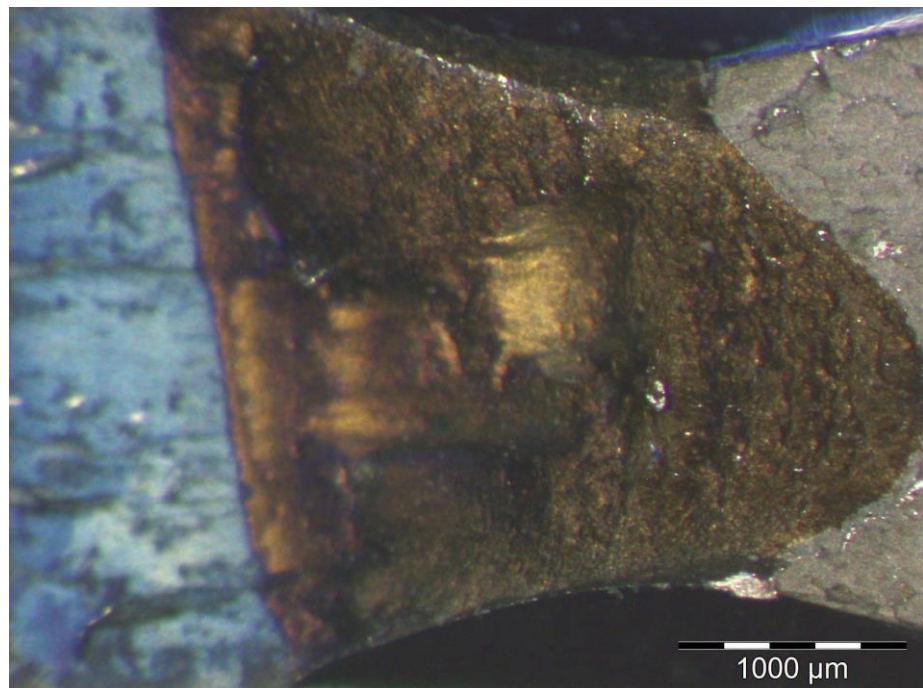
Stereo microscope image of crack surface after fracture testing for test temperature 300°C.
